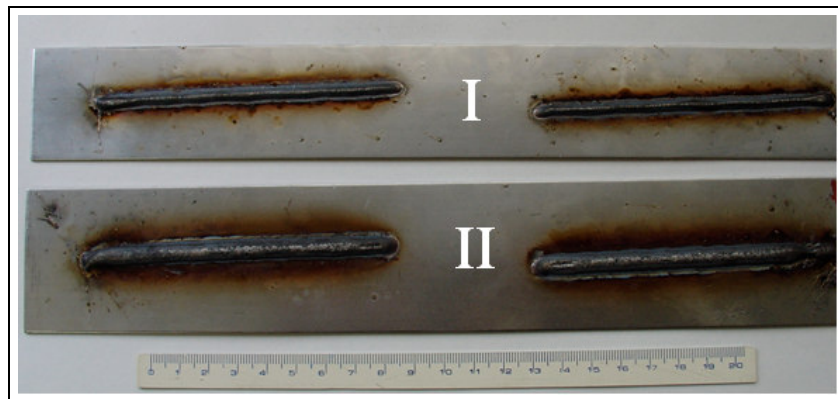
Sample welded, I – higher heat input and II – lower heat input.
